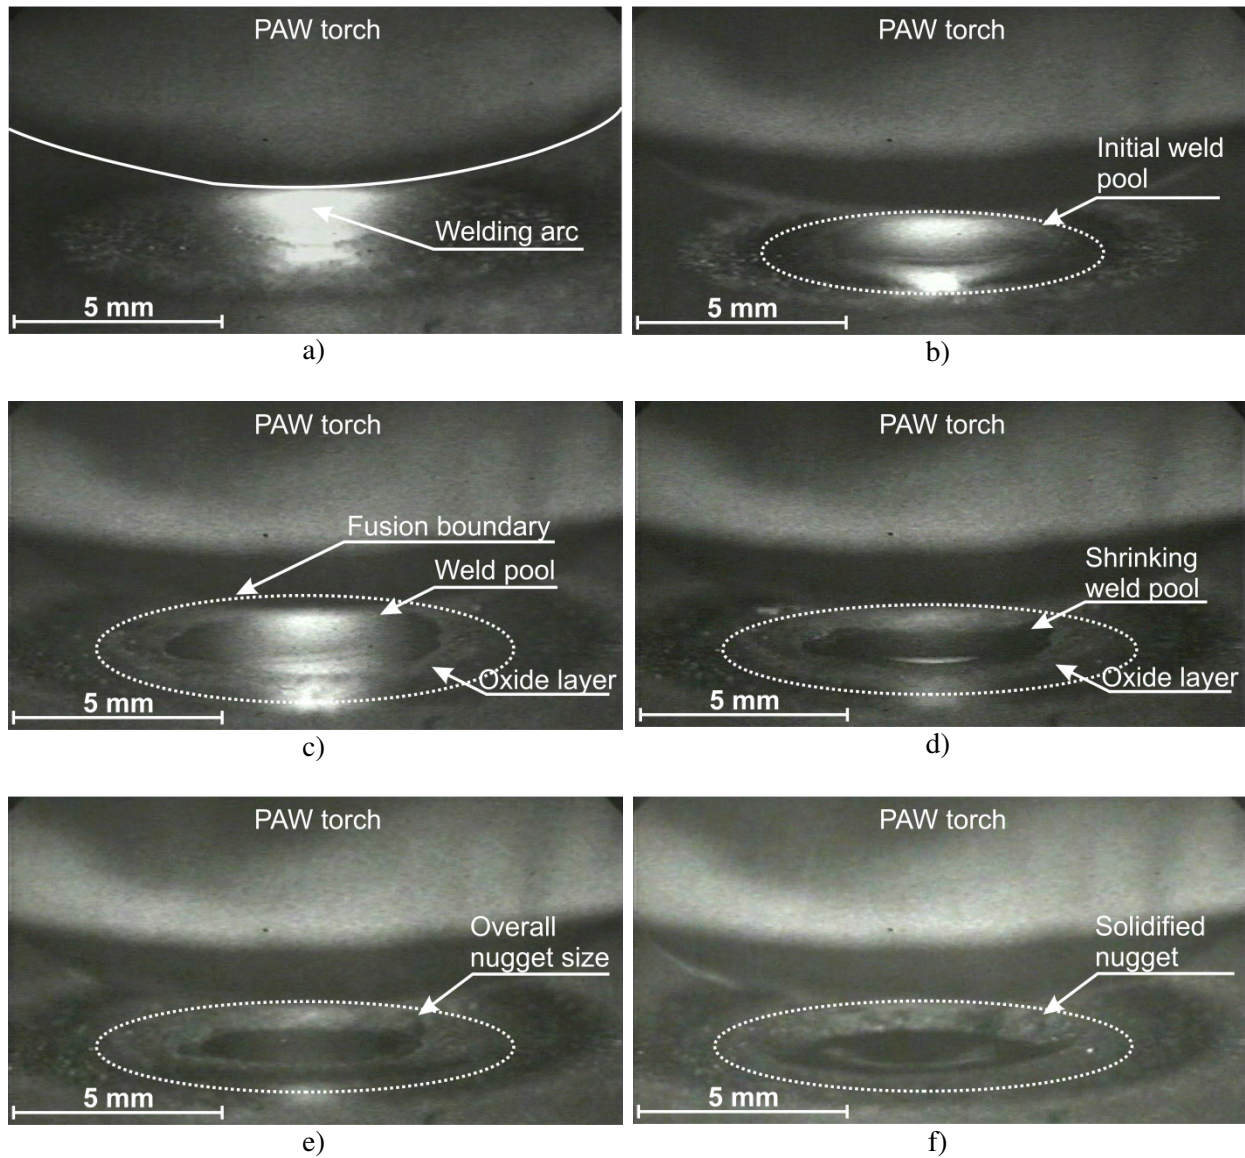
Solidification sequence of a DSA spot weld taken using a Laser Strobe imaging system showing: *a*) arc initiation; *b*) weld pool formation and growth; *c*) maximum weld pool size; *d*) decrease in welding current and weld pool size; *e*) weld pool after arc shutoff; *f*) solidified weld pool.
